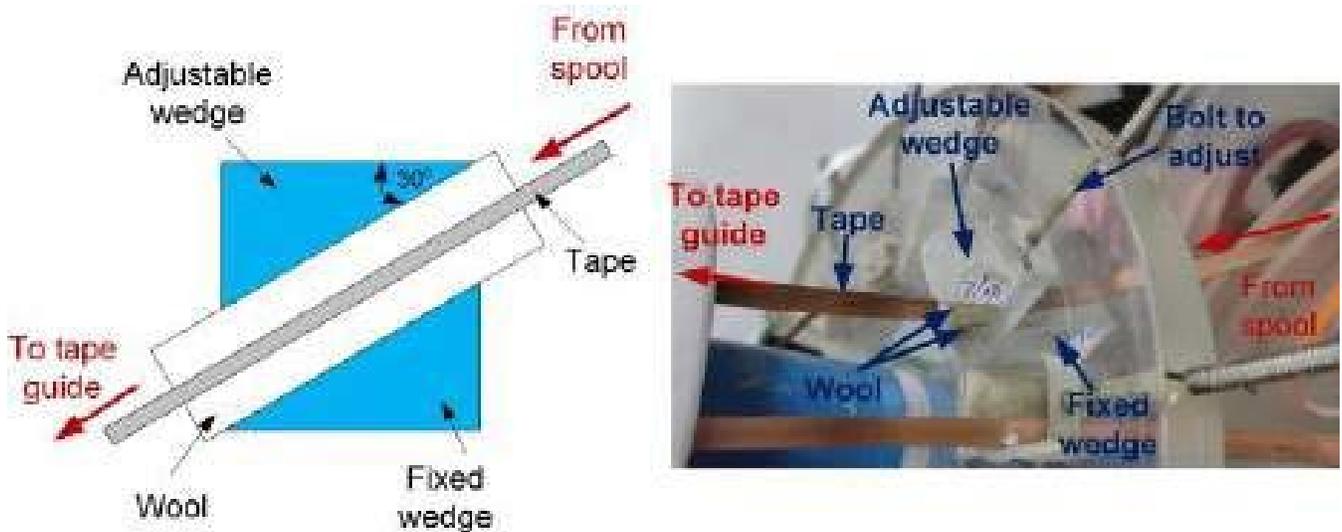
Cross-sectional view and photograph of the tightening mechanism.
